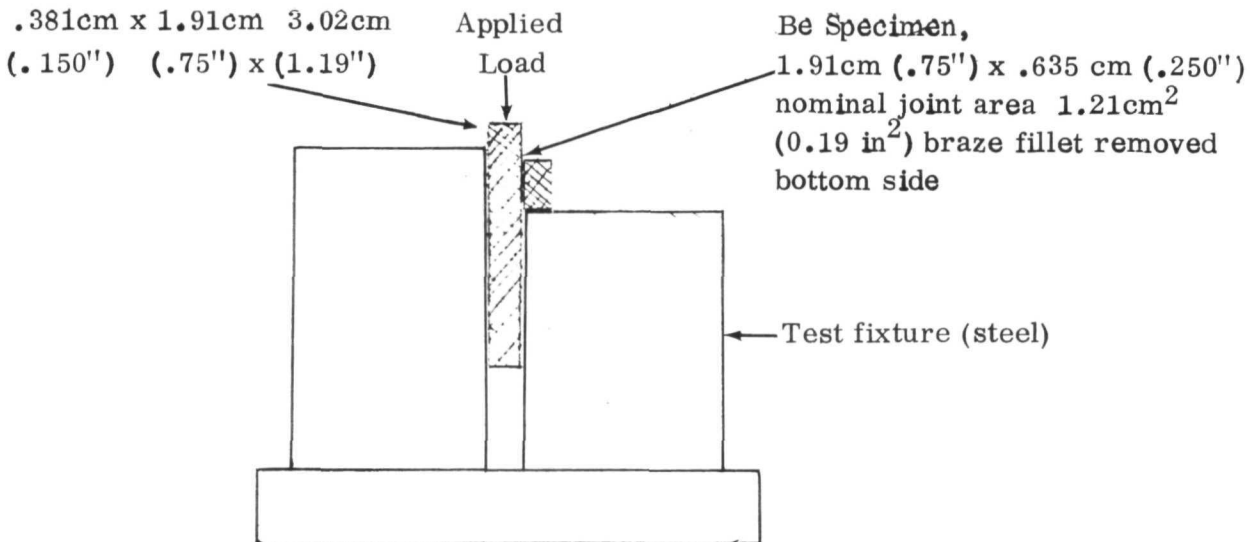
LAP SHEAR TEST SPECIMEN AND TEST FIXTURE
